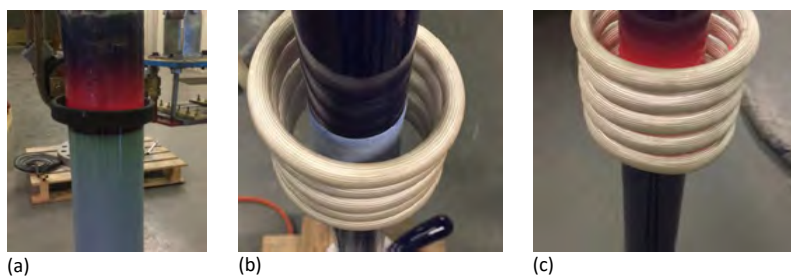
Firing a shaft with (a) a single loop, (b) coil design, and (c) lowering the coil as the glass melts
